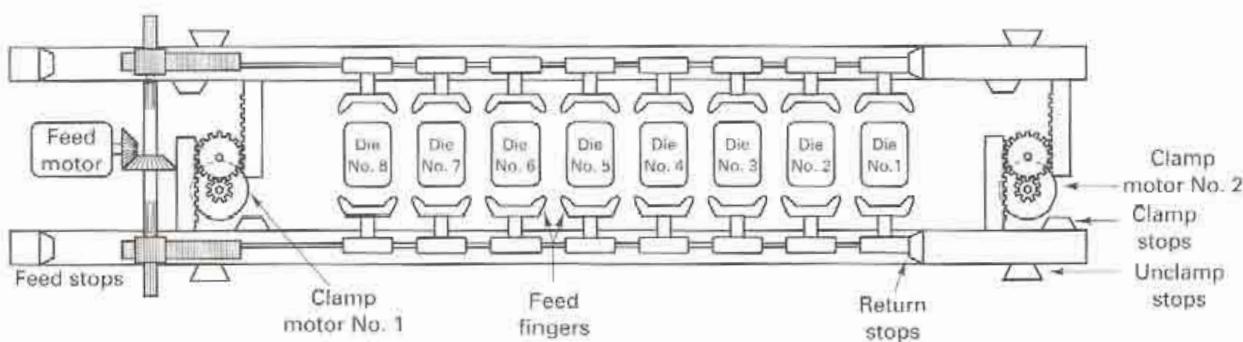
Schematic showing the arrangement of dies and the transfer mechanism used in transfer presses. (Courtesy of Verson Allsteel Press Company, Chicago, IL.)
